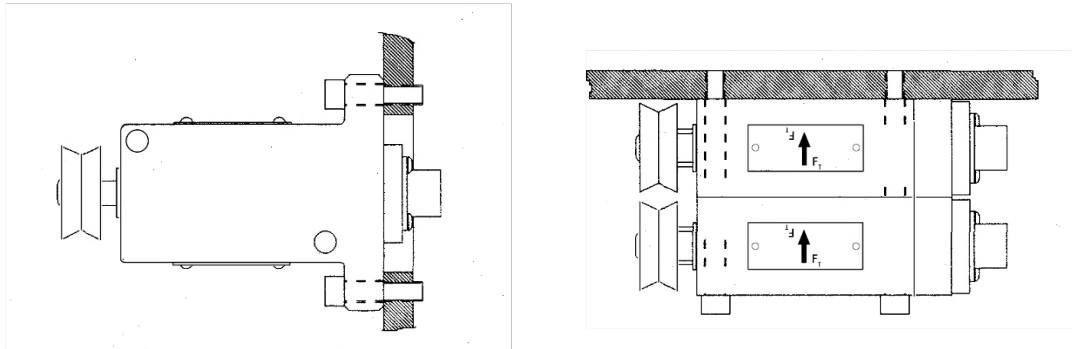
STACKABLE HOUSING MOUNT (end) Figure 7 – STACKABLE HOUSING MOUNT (side)
